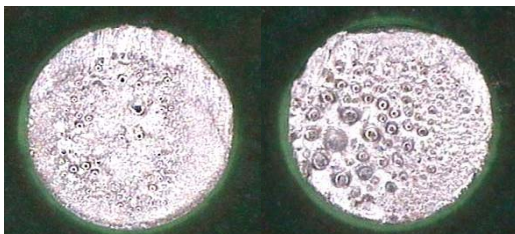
Examples of ball shear fracture Type D for palladium finish with eutectic solder ball (left) and Pb-free solder ball (right)
